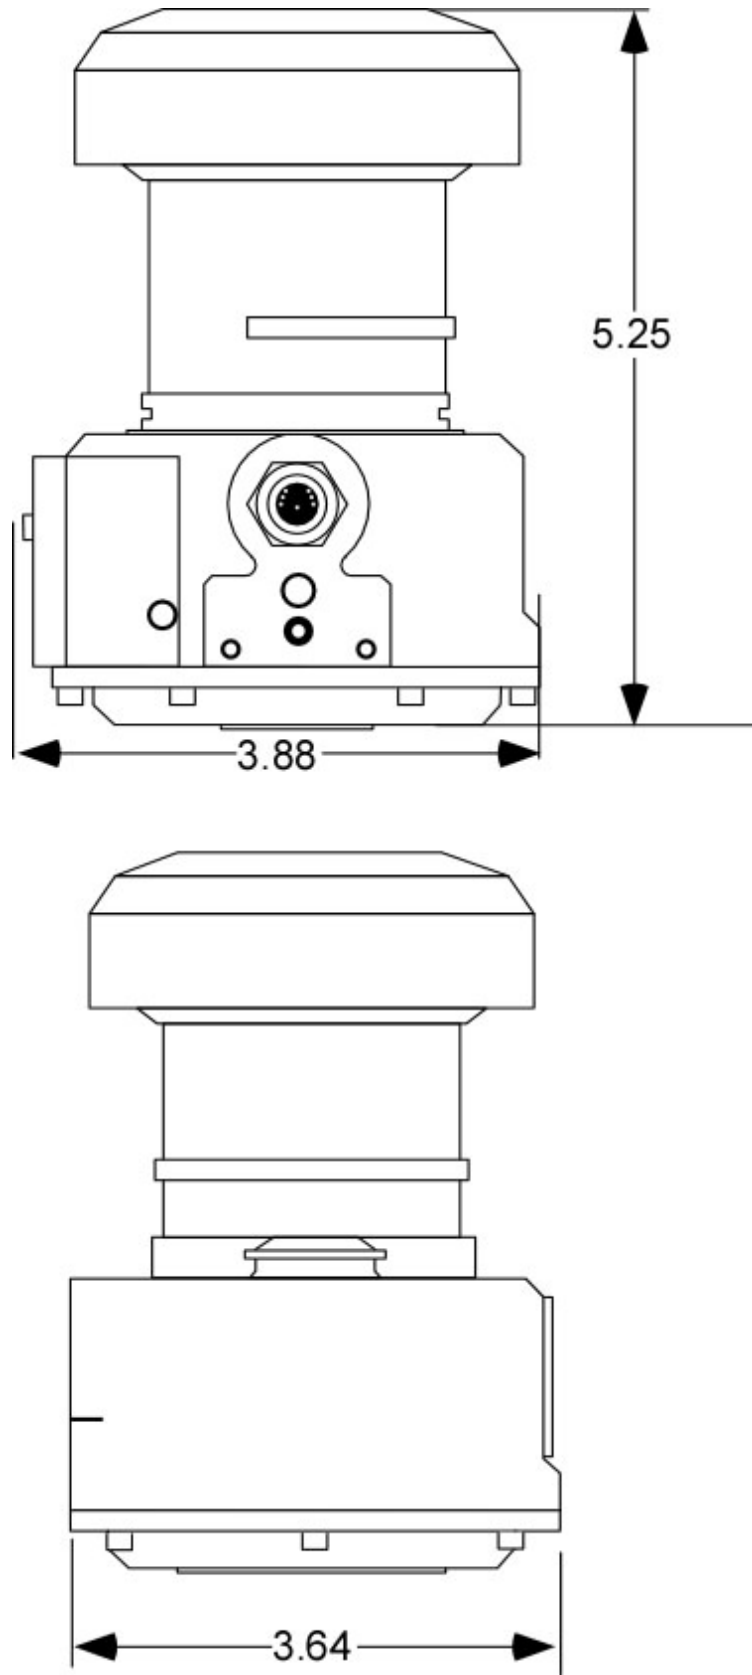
Sensor Assembly Outline Dimensions (PN 6455000)
